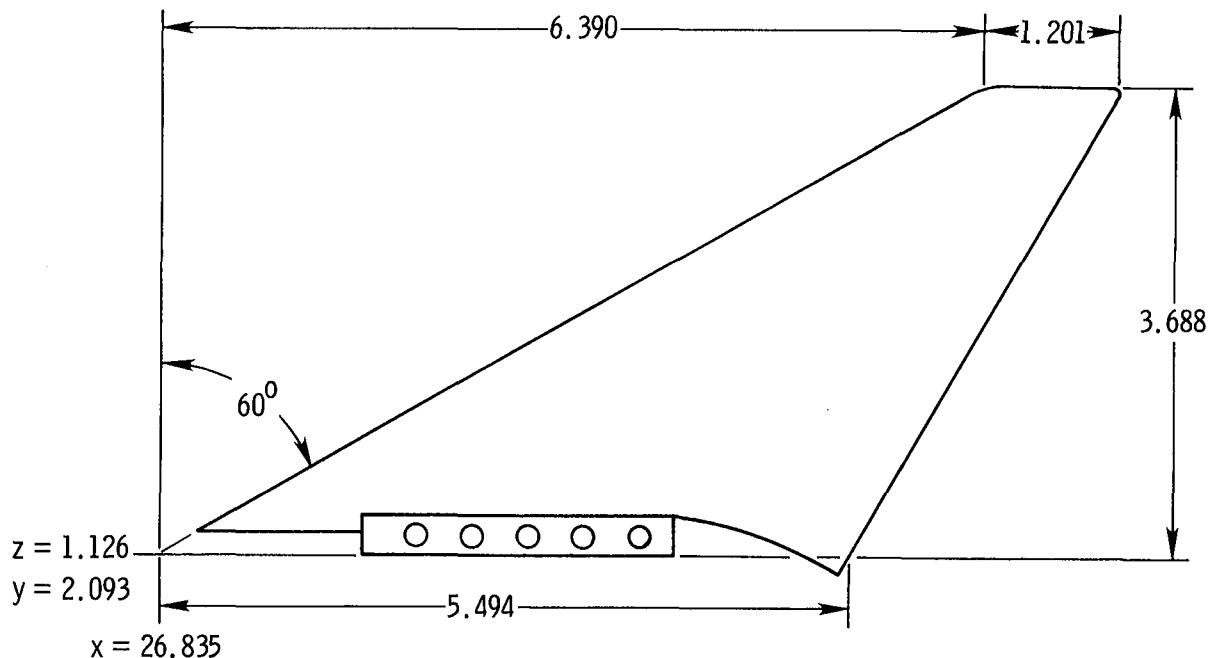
Details of vertical tail. Linear dimensions are in inches.
